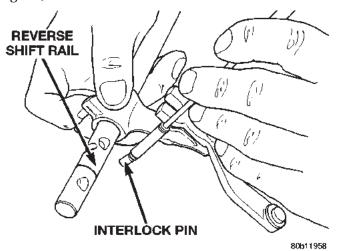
Remove Interlock Pin From Reverse Shift Rail
